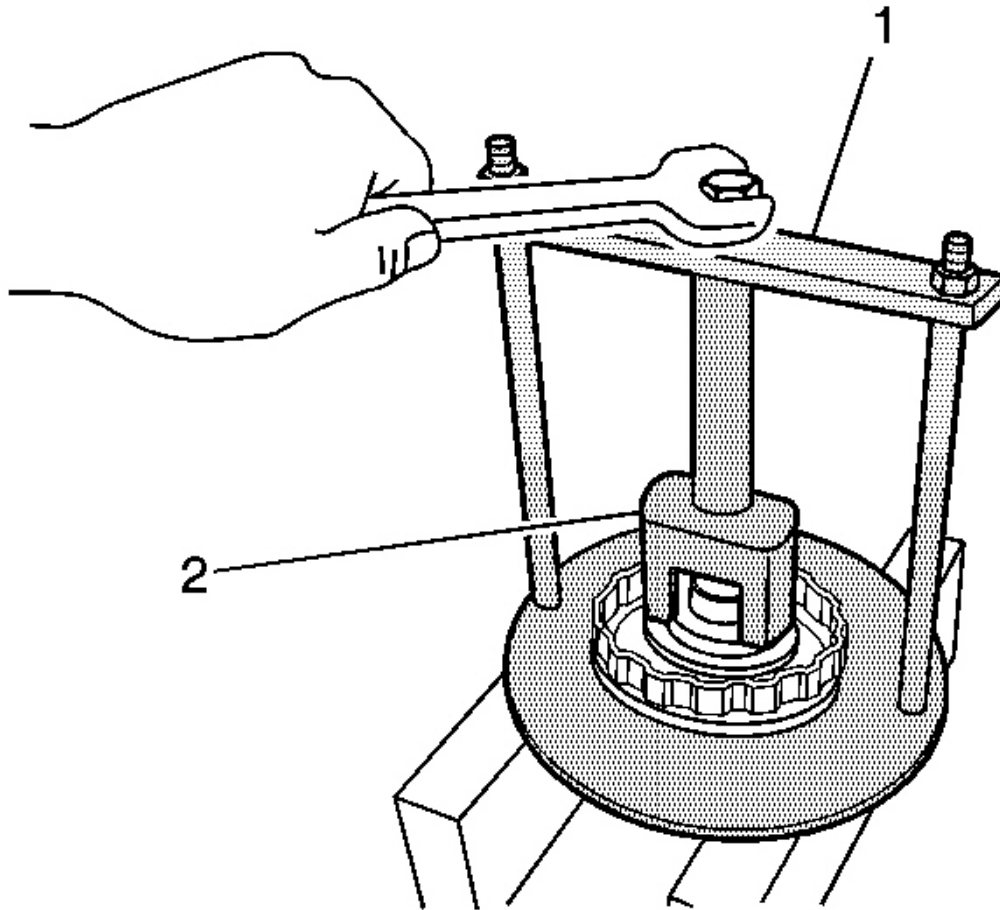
Return Spring, Compress, DT 46451 & DT 46453
